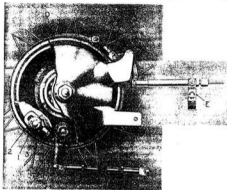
Internal and External Brakes Operating on Drum D. External Brake Adjusted by Moving Clamp E or Turning Clevis B; Internal Brake by Turning Screw 4.
